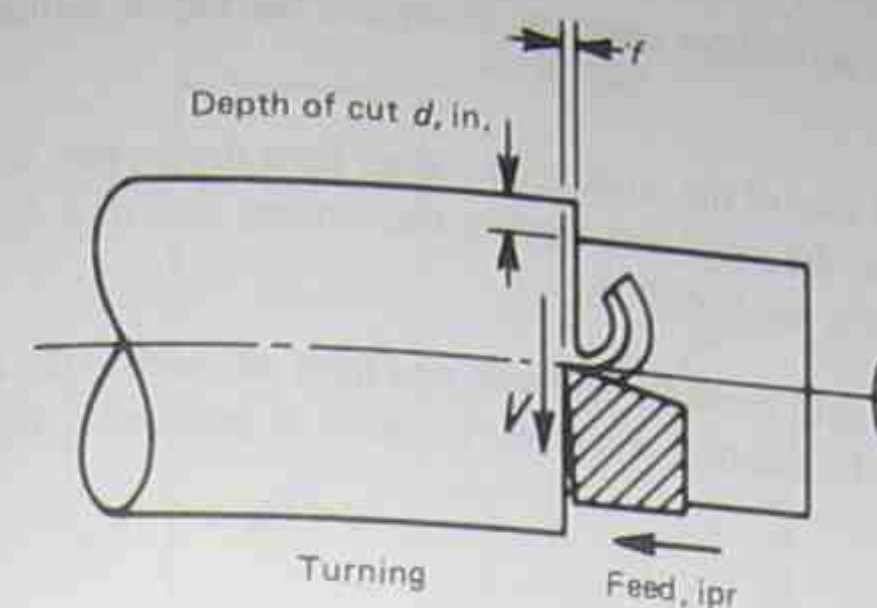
Illustration of turning, showing tool and workpiece motions.
